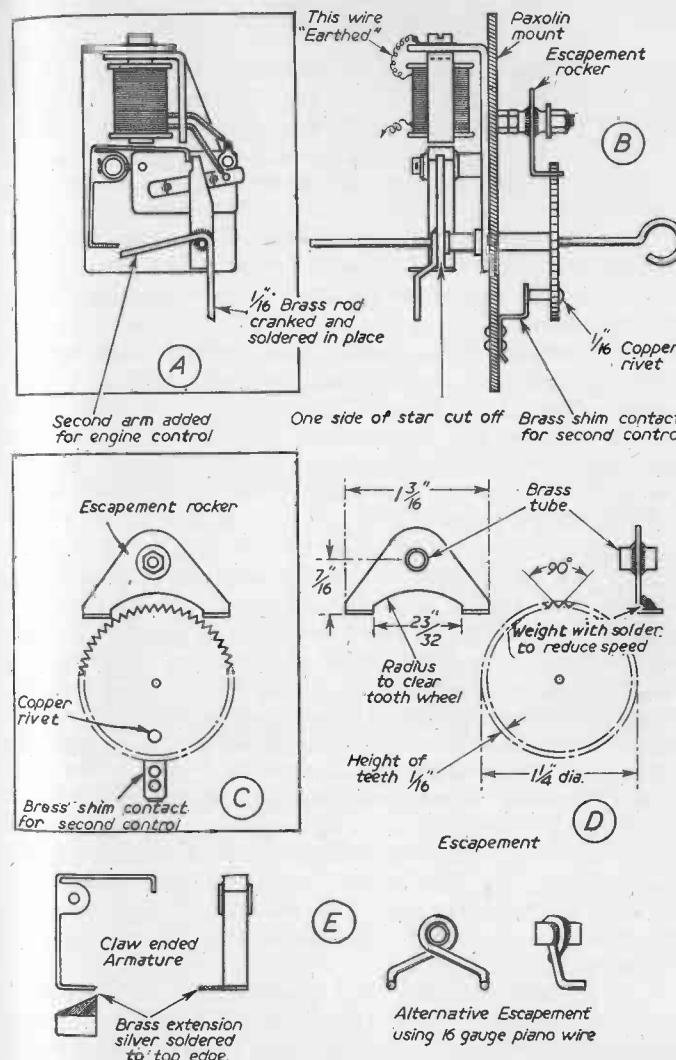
The improved compound actuator. A, B and C are three views of the actuator; D gives details of the escapement and E shows an alternative escapement and the claw-ended armature.
